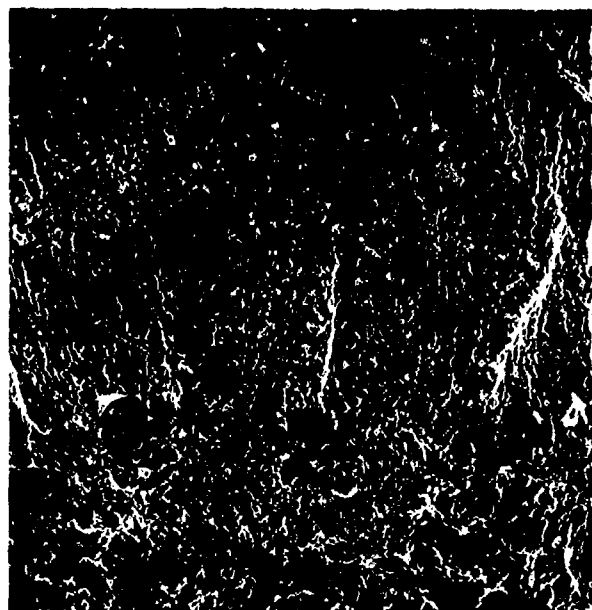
Fatigue fracture surface of temper-embrittled A-514 weldment containing LOP, 70x.
